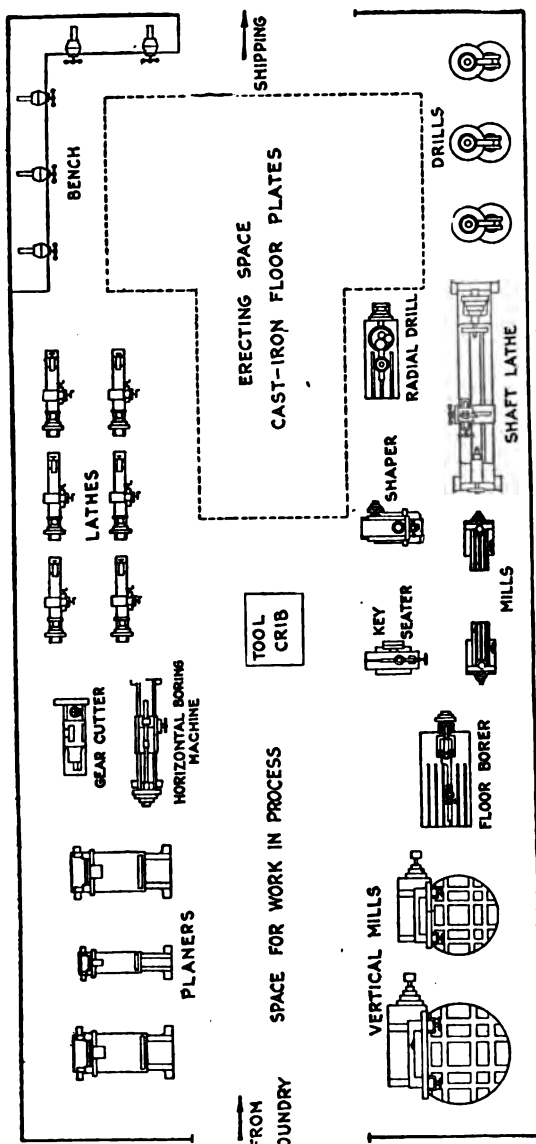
Typical arrangement of machines in a jobbing shop.
